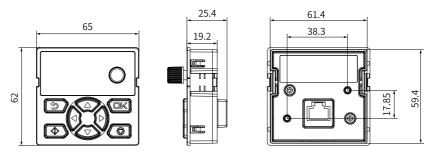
Dimensions (unit: mm) of the MD-BP-M
